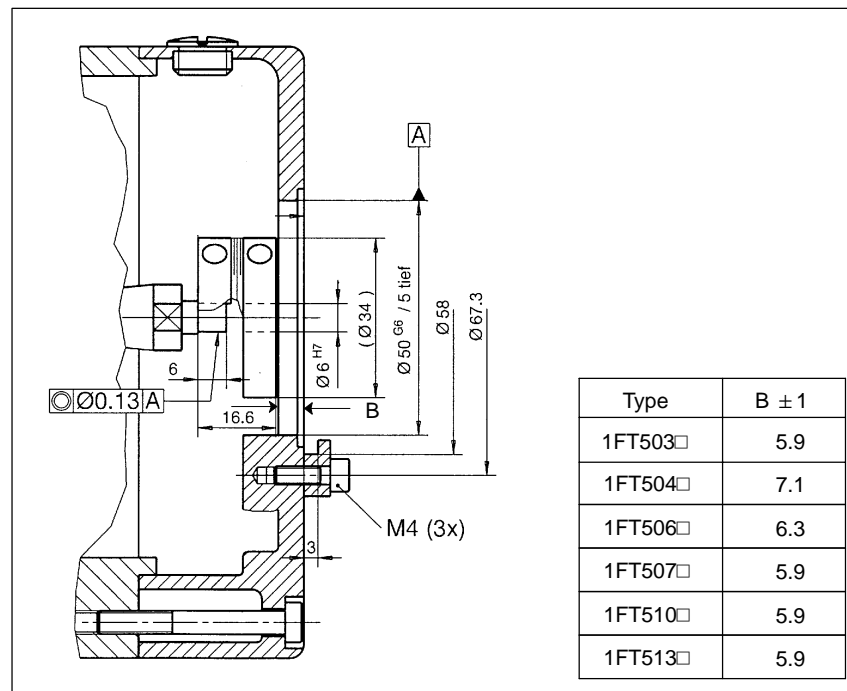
Mounting absolute angle encoders with standard pulse encoder flange onto motors 1FT503□ to 1FT513□
